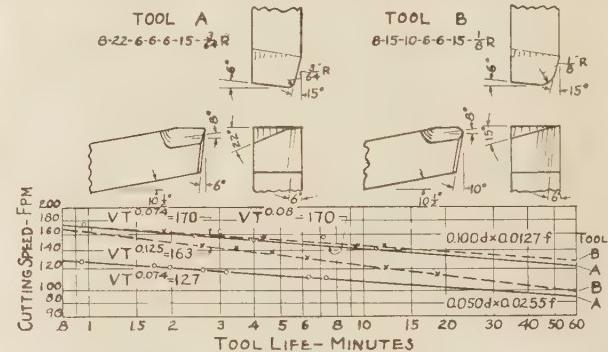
CUTTING-SPEED TOOL-LIFE CURVES FOR DRY TURNING MONEL METAL, COMPARING TWO TOOL SHAPES
